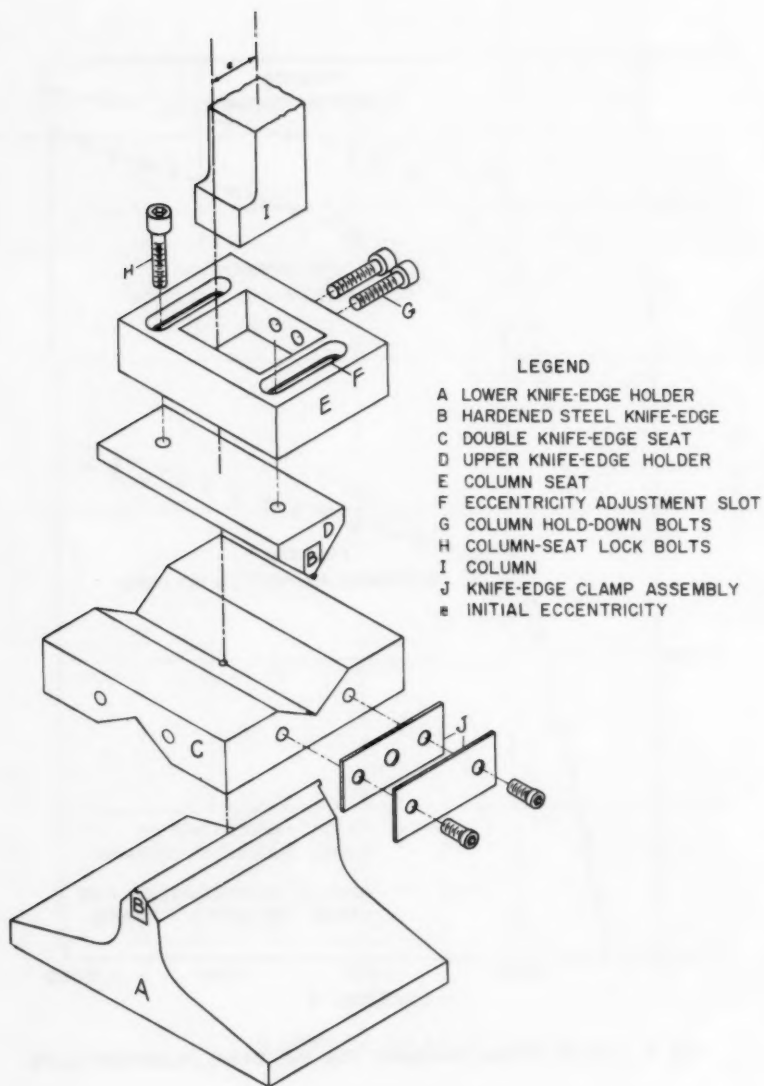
DOUBLE KNIFE-EDGE COLUMN FIXTURE
